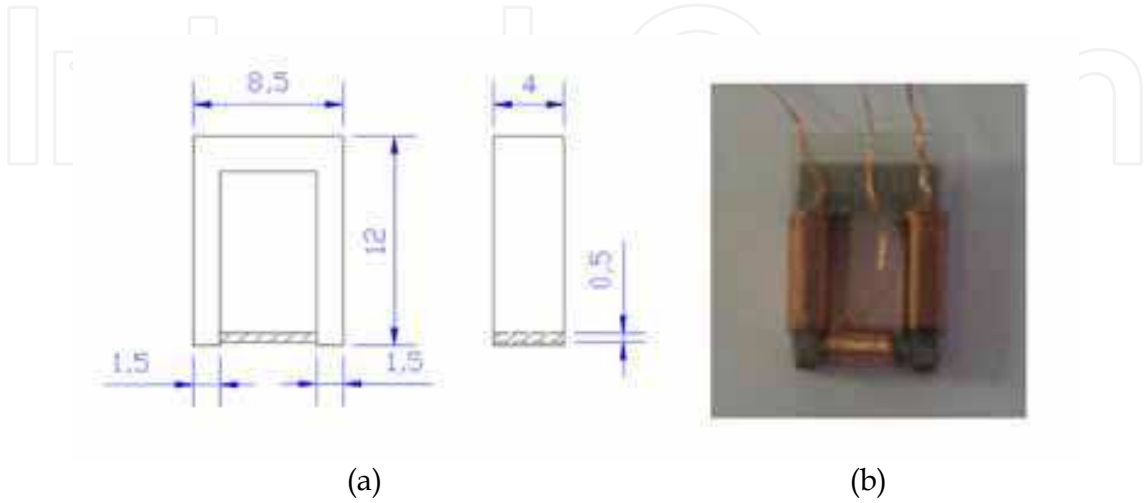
Dimension (a) and photograph (b) of U-shape sensing yoke
